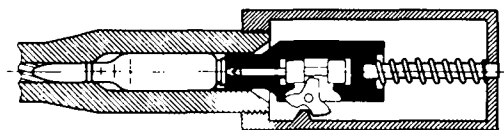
Drawing showing the operational principle of a mass locked breech bolt.
